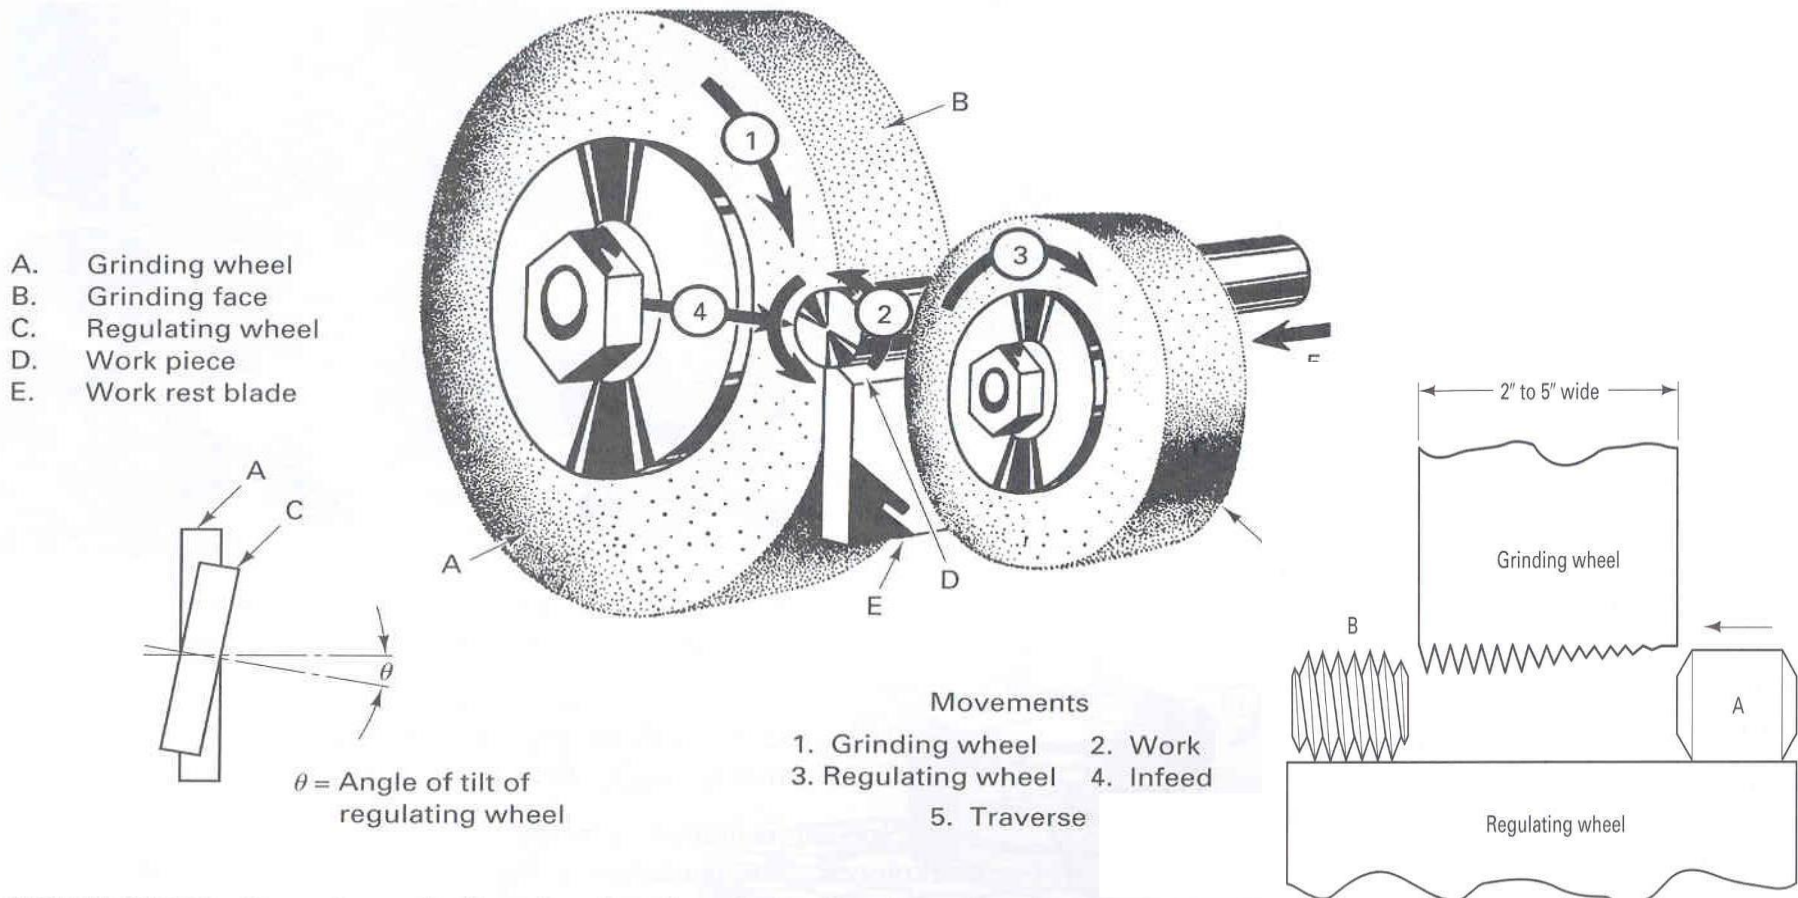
Centerless grinding showing the relationship between the grinding wheel, the regulating wheel, and the workpiece in centerless method. (Courtesy of Carborundum Company.)
